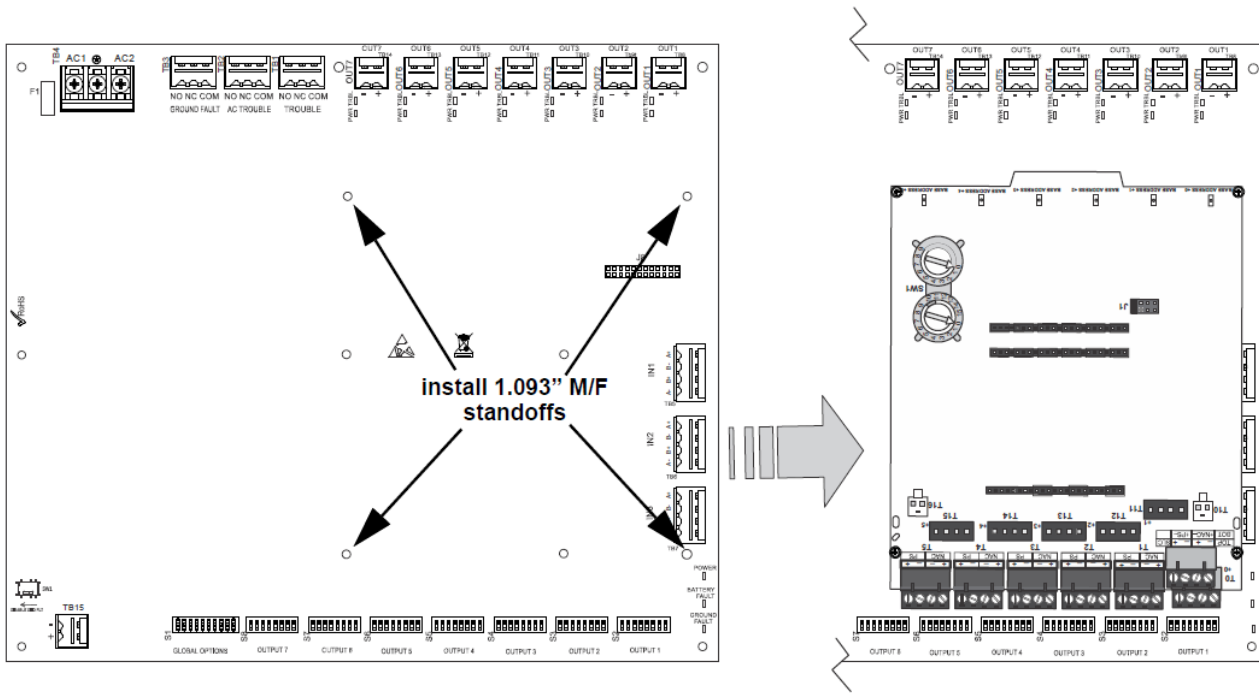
Mounting a Single Module in the Power Supply Cabinet
